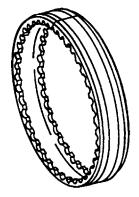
Gas Generator Cooling Plate Seal Ring; Inspection
